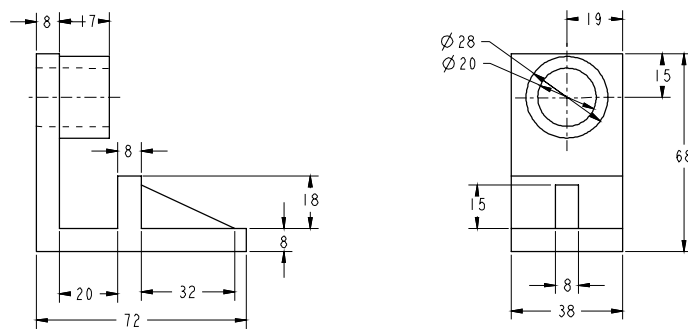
Front view and the right-side view of the model for Tutorial 2
